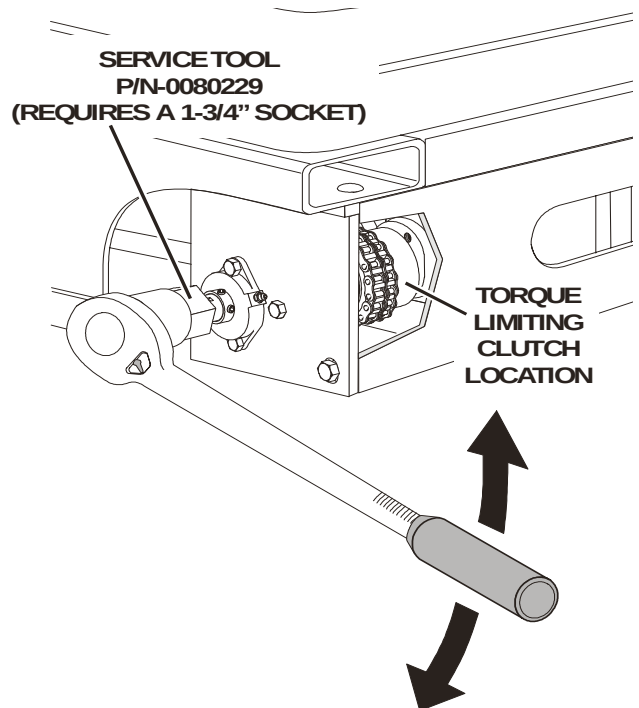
Check Torque Limit Clutch - Torque Setting.
